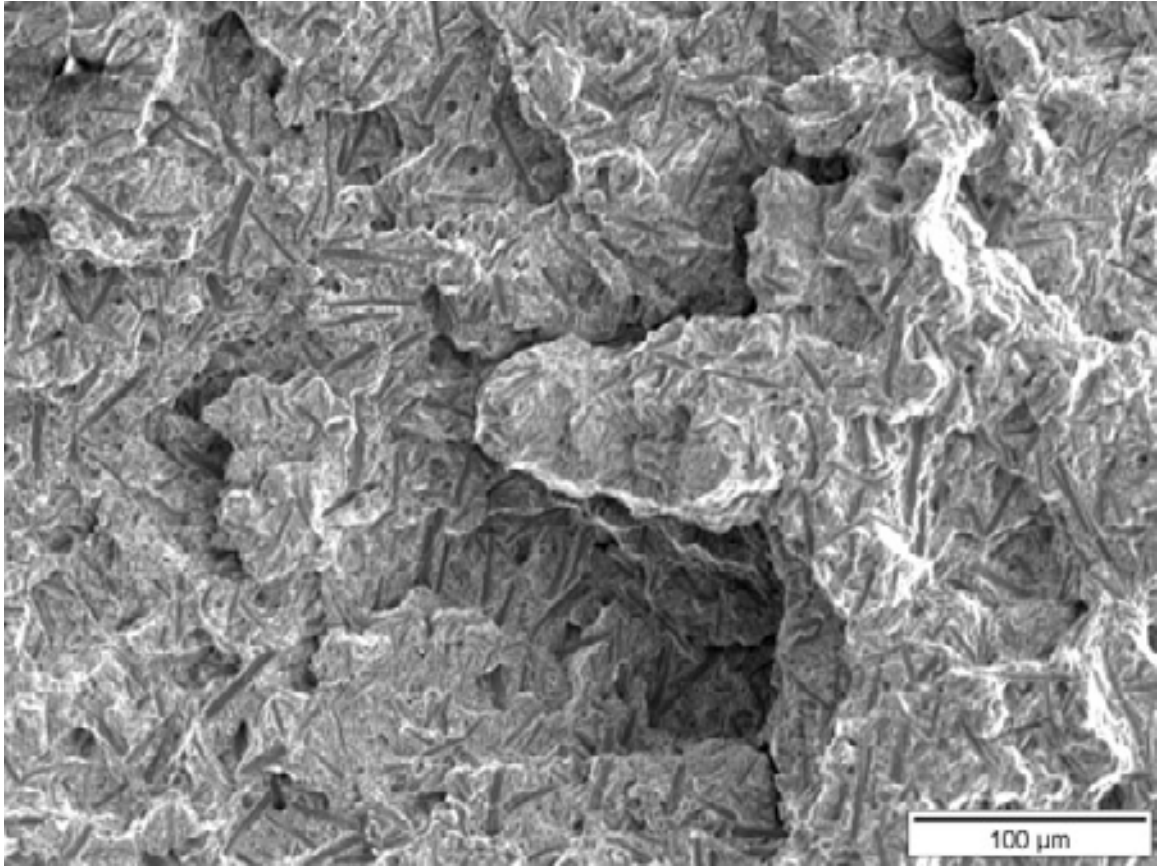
Fracture surface of compacted Ti-6Al-4V-1.6B modified alloy showing a jagged fracture surface, suggesting brittle fracture.
